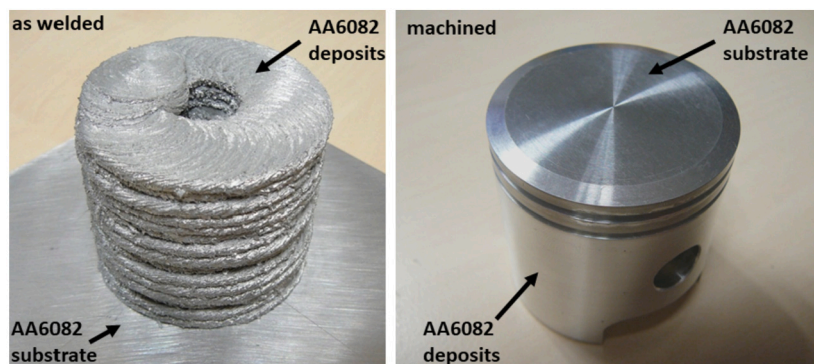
Closed cylindrical shell structure from AA6082 additively manufactured via MLFS: as welded (left) and after machining to the final piston (right).
